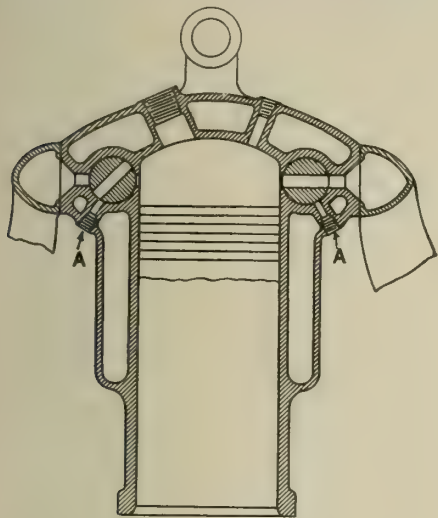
Fig. III. Diagrammatic Section of the Mead 277 8 Engine. A, A are lubricating nozzles.
